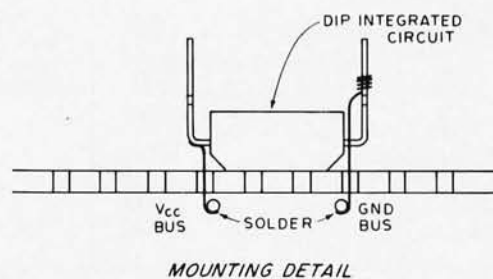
Mini Wire Wrap Construction. The integrated circuits are mounted without sockets, upside down on a perforated board base. The mounting detail shows how the IC is attached by using a short jumper through the board.
